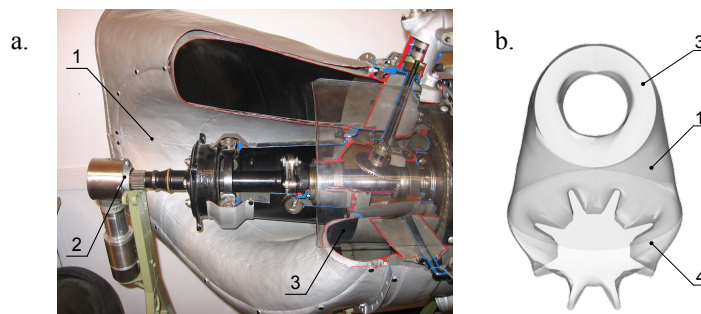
PZL-10W engine exhaust system, a – classic version, b – modified version to cooperate with exhaust cooler:
